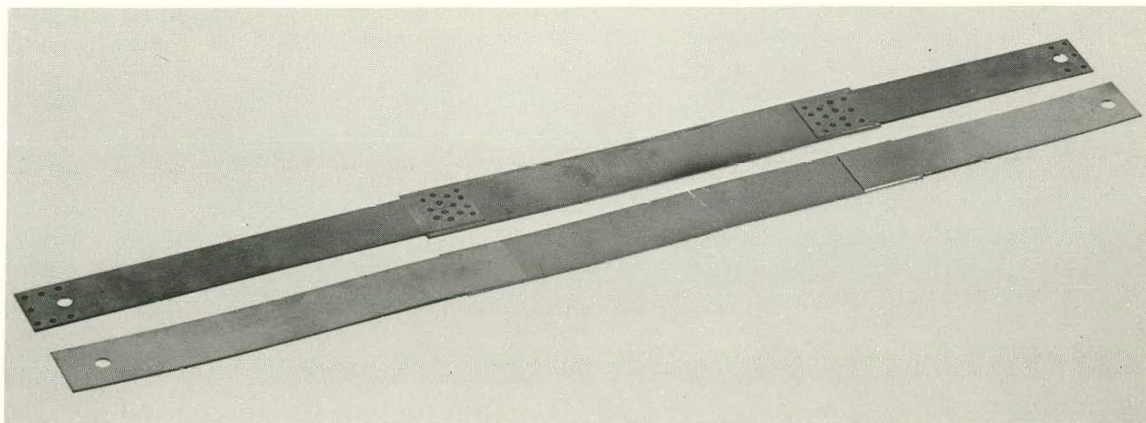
Two specimens prepared for creep testing. Rear specimen shows location of spot welds attaching straps to fuel strip. Ends of straps are also joined by spot welding (Neg. P62-6-17I)
